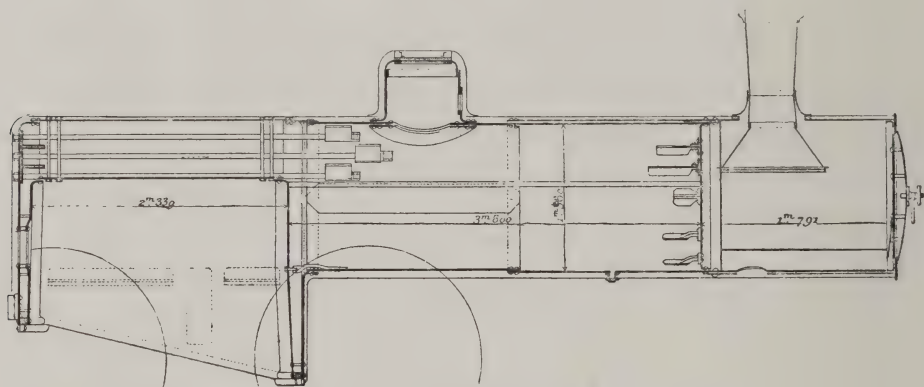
TYPICAL BELPAIRE BOILER OF A FRENCH LOCOMOTIVE.
